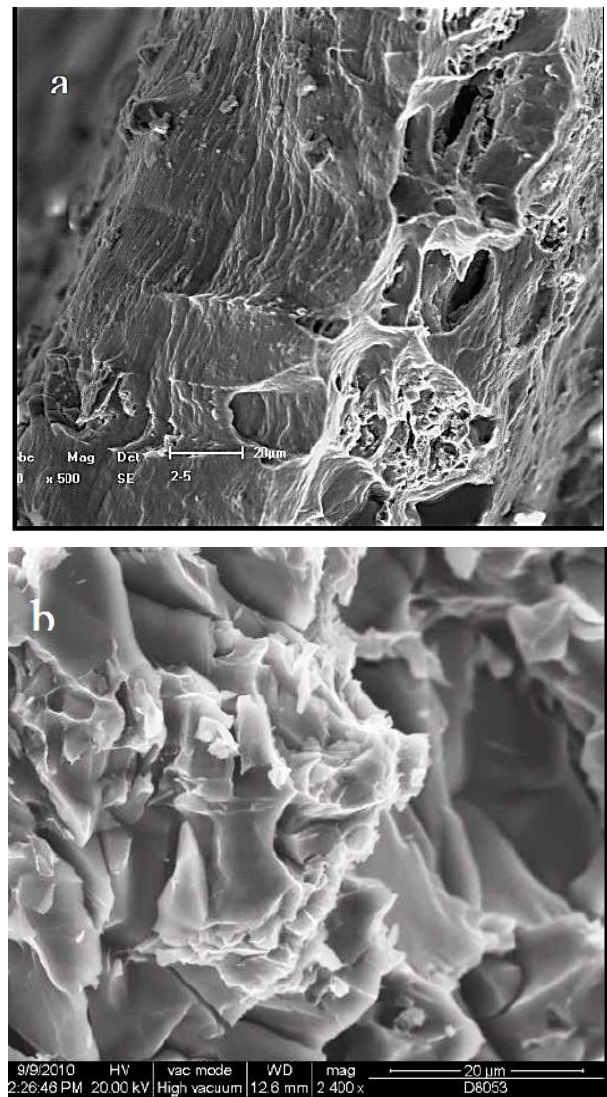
Typical fracture surface morphology for (a) compressive test and (b) impact toughness test.
